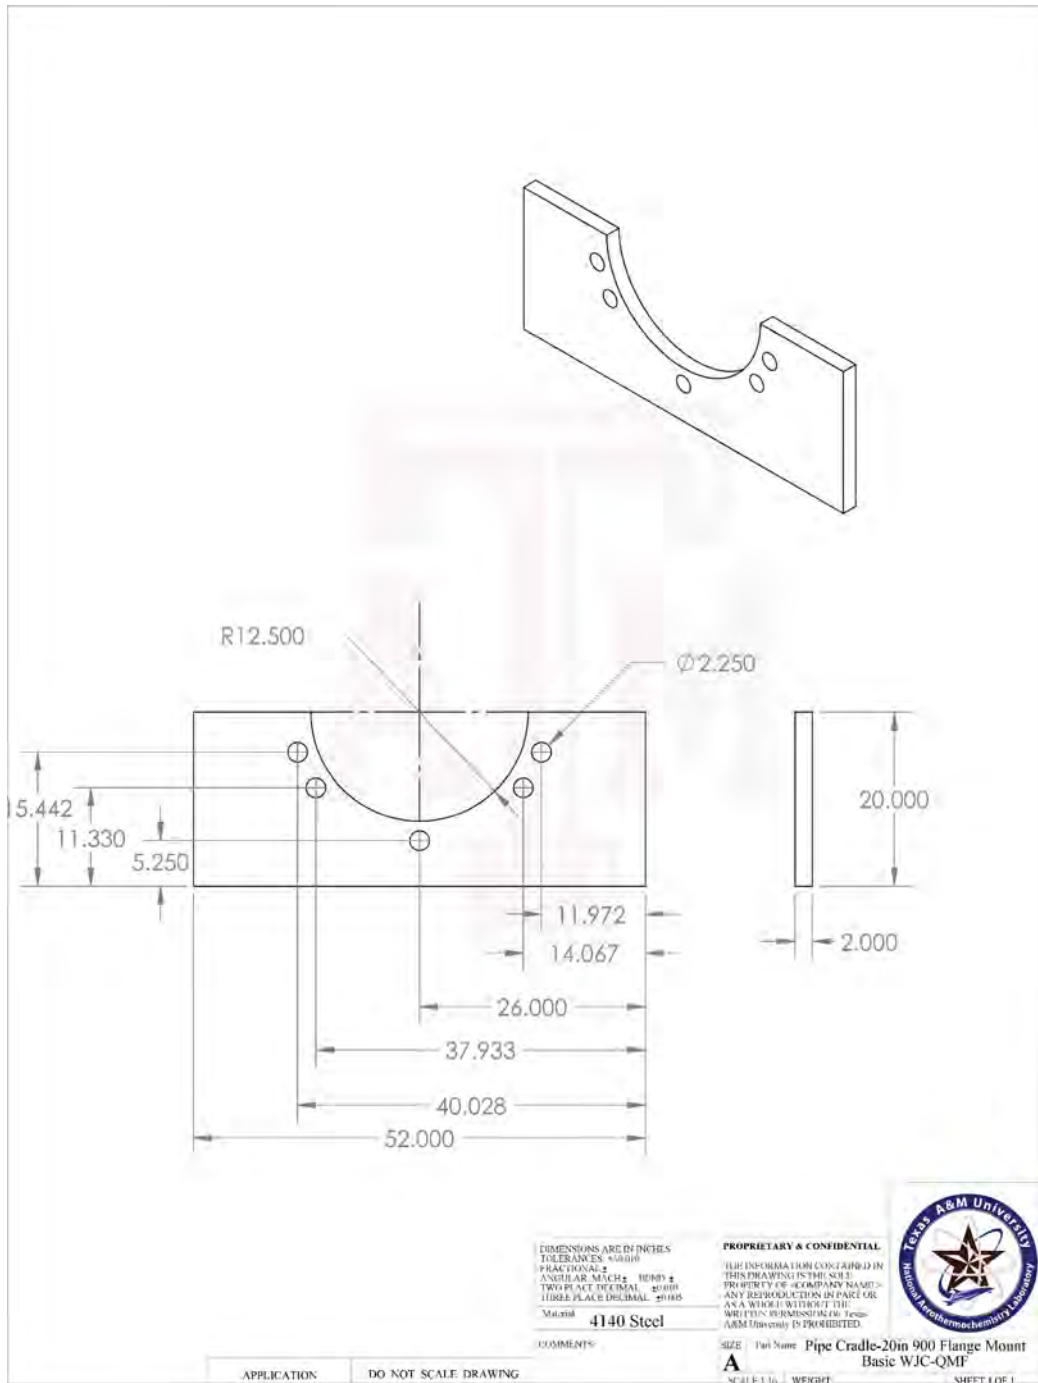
DIMENSIONAL DRAWING FOR PIPE CRADLE PLATE TO HOLD THE 20-IN 900-LB FLANGES AND 20-IN SCHEDULE 160 PIPE.
